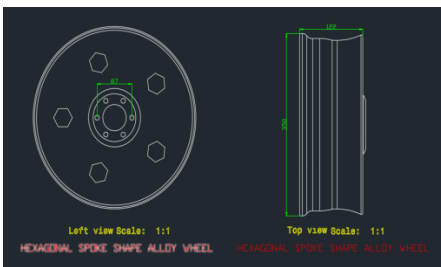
DIMENSIONS OF THE HEXAGONAL ALLOY WHEEL
